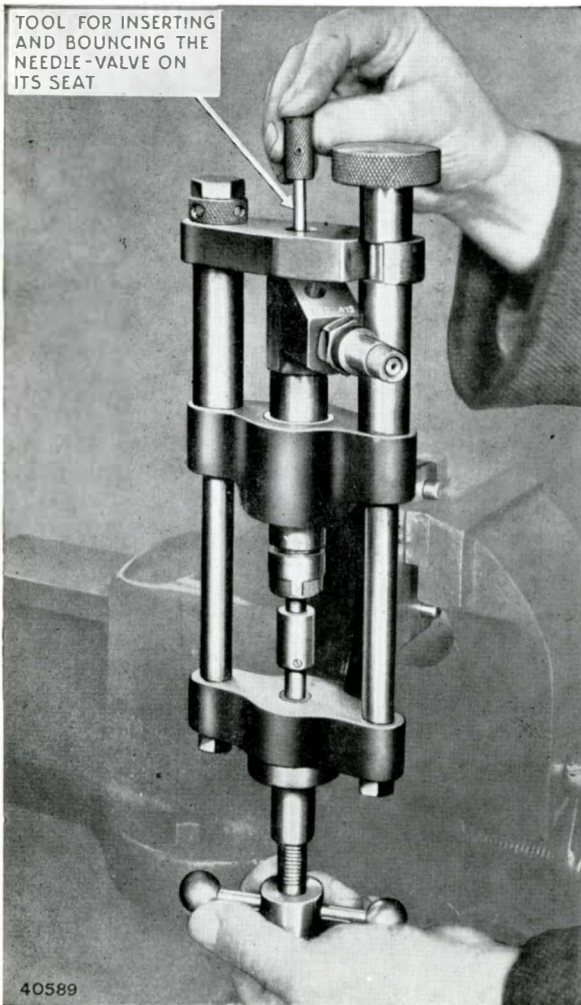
CLAMPING THE NOZZLE AFTER CENTRALIZING THE NEEDLE VALVE
